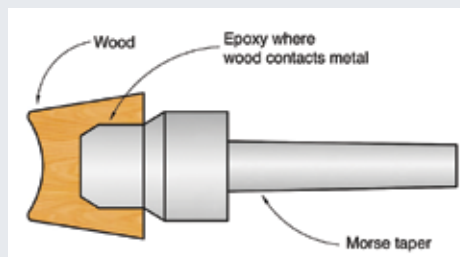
Use a ball-bearing revolving center for making the tailstock cup center.
